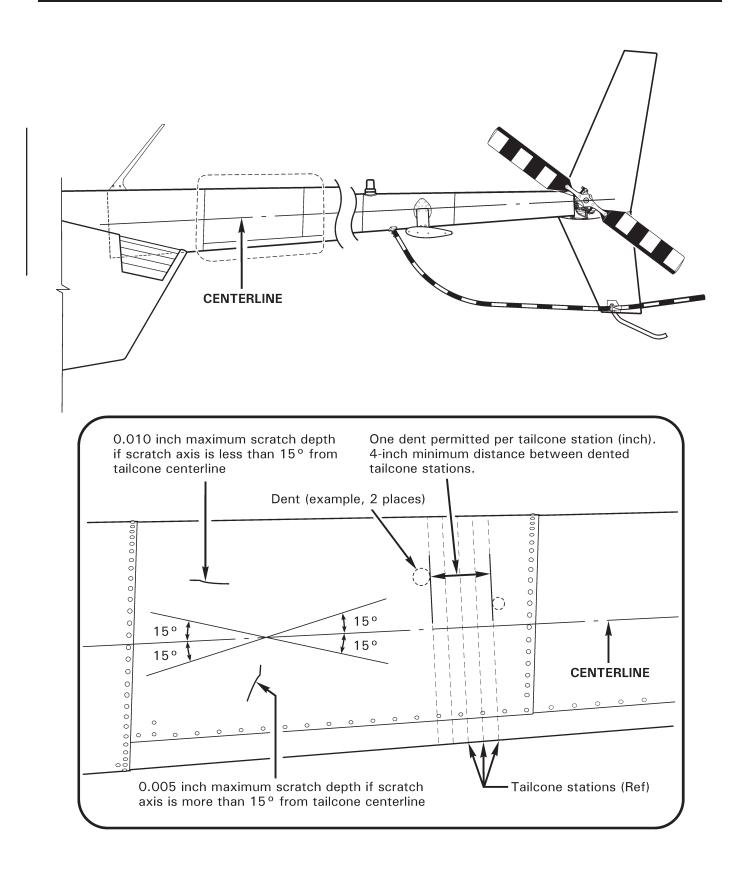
TAILCONE INSPECTION AND REPAIR
